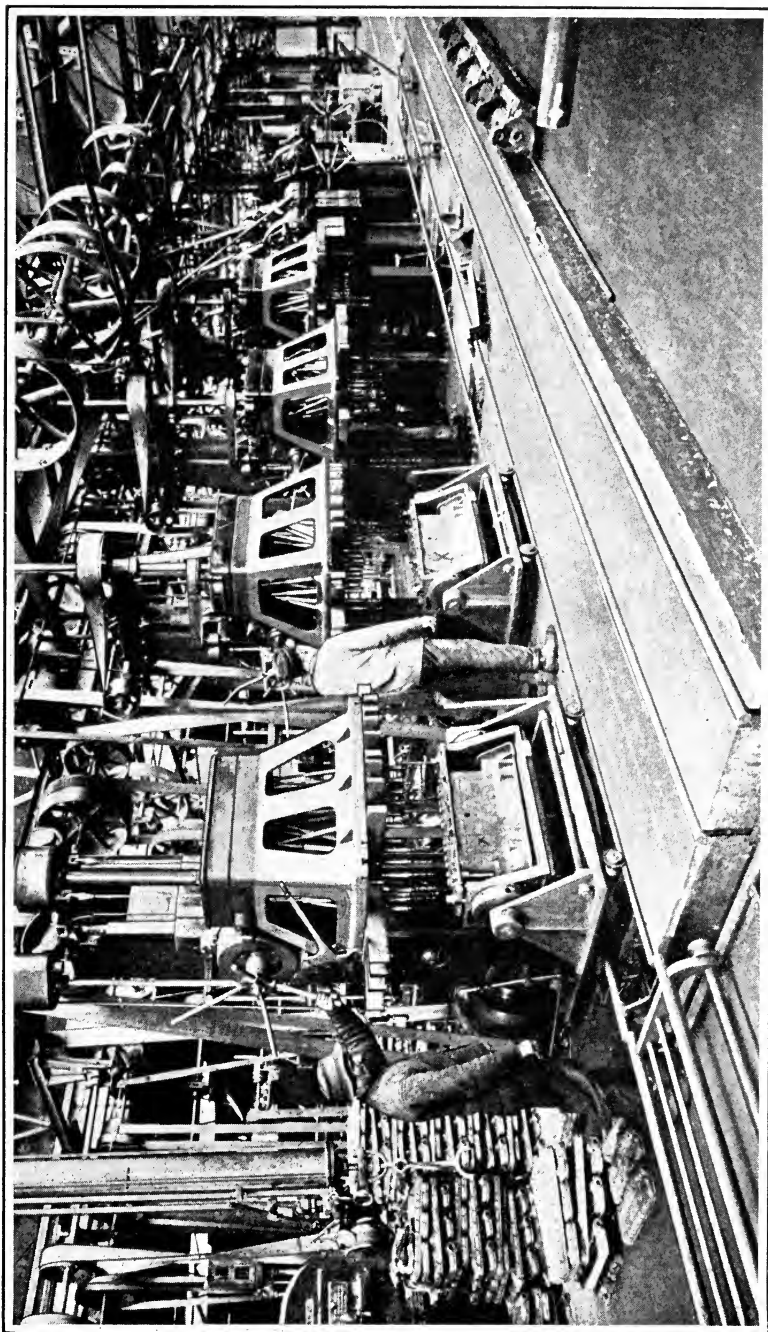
Traveling Jigs used in Connection with Multiple-spindle Drilling Machines for Machining Automobile Engine Cylinder Blocks
